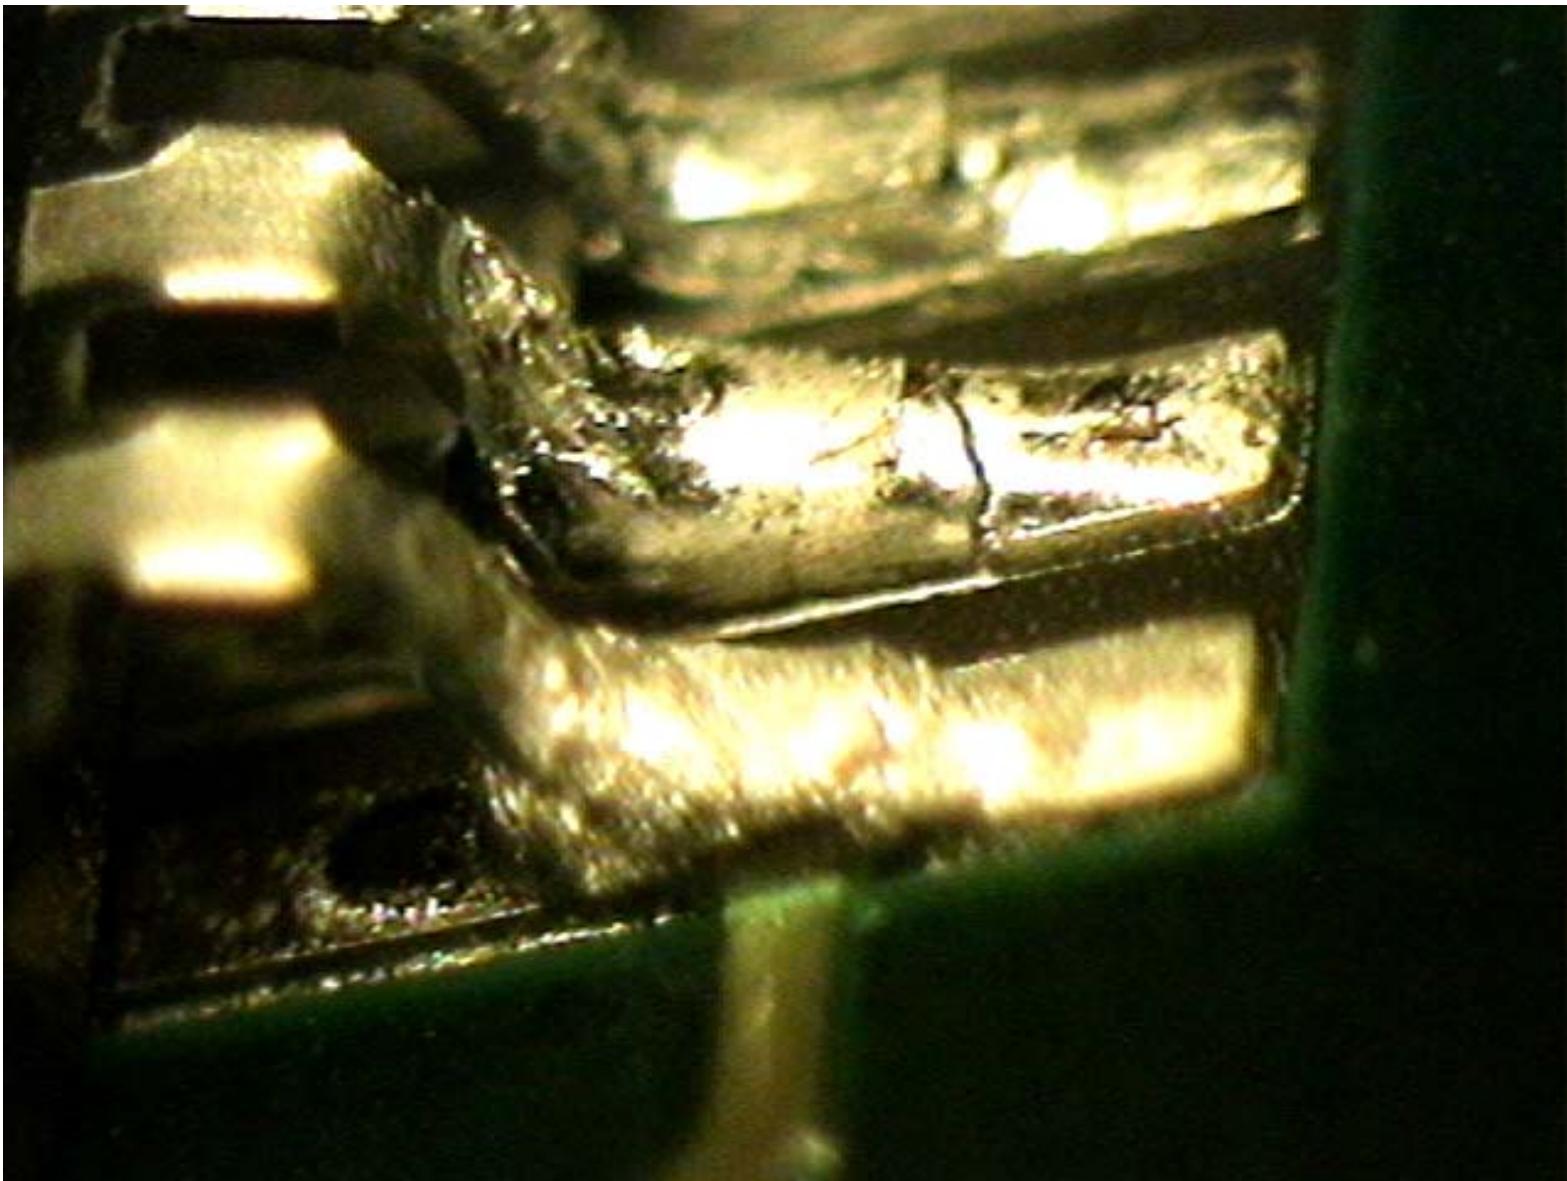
Vehicle ID 160, Reworked TQFP-208 U3, SAC Solder/NiPdAu Component Finish, 150x
